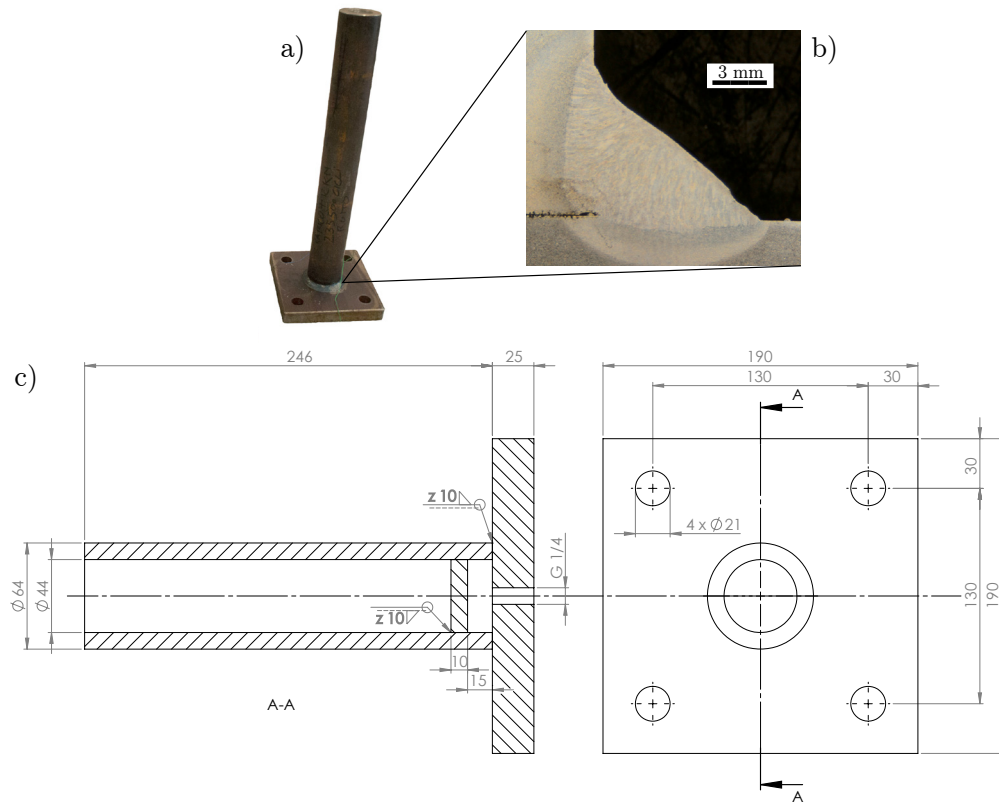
Real sample (a), micrograph of the weld seam (b), technical drawing of the specimen (c) from [5]
